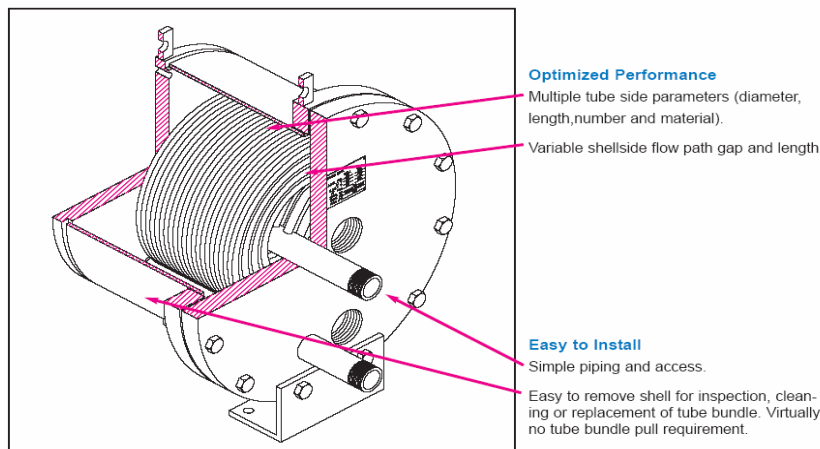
Cross-section of Spiral Tube heat exchanger
